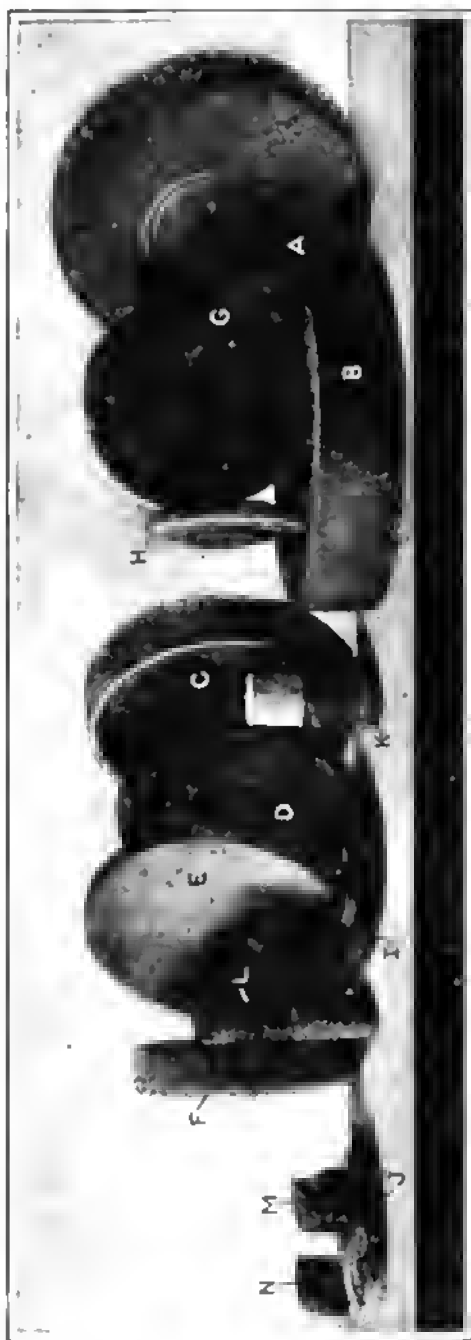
(A) Cerundum Grinding Wheel; (B) Set-up Wheel with Leather Segments mounted in Steel Frame; (C, D and F) Various Types of Set-up Wheels with Leather Face mounted on Wooden Disk; (E) Plain Felt Wheel; (G) Rag Wheel with Abrasive glued to the Polishing Surface; (H) Polishing Wheel with Face trued up to conform to Contour of Work; (I and J) Sheepskin Wheels, to be charged with Flour of Emery, Rouge, etc.; (K, L, M, and N) Grease and Fine Abrasive Material prepared in Sticks for Application to Polishing Wheels
